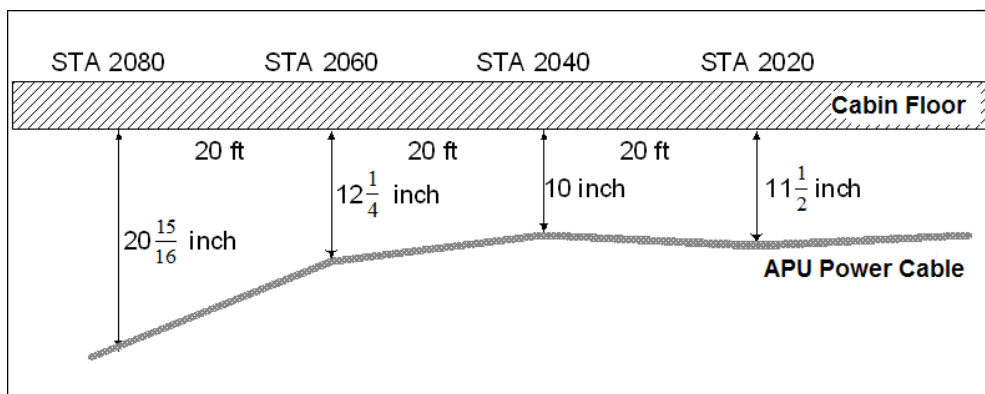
Standoffs Located with Various Height to Floor Level
